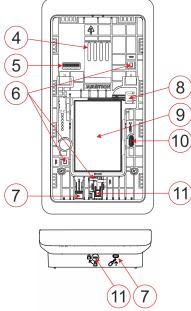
internal part: 4 – connection points of the terminal; 5 – serial number; 6 – tamper contacts; 7 – rear part tab; 8 – connector for the backup battery connection; 9 – backup battery; 10 – USB-C connector; 11 – locking mechanism
